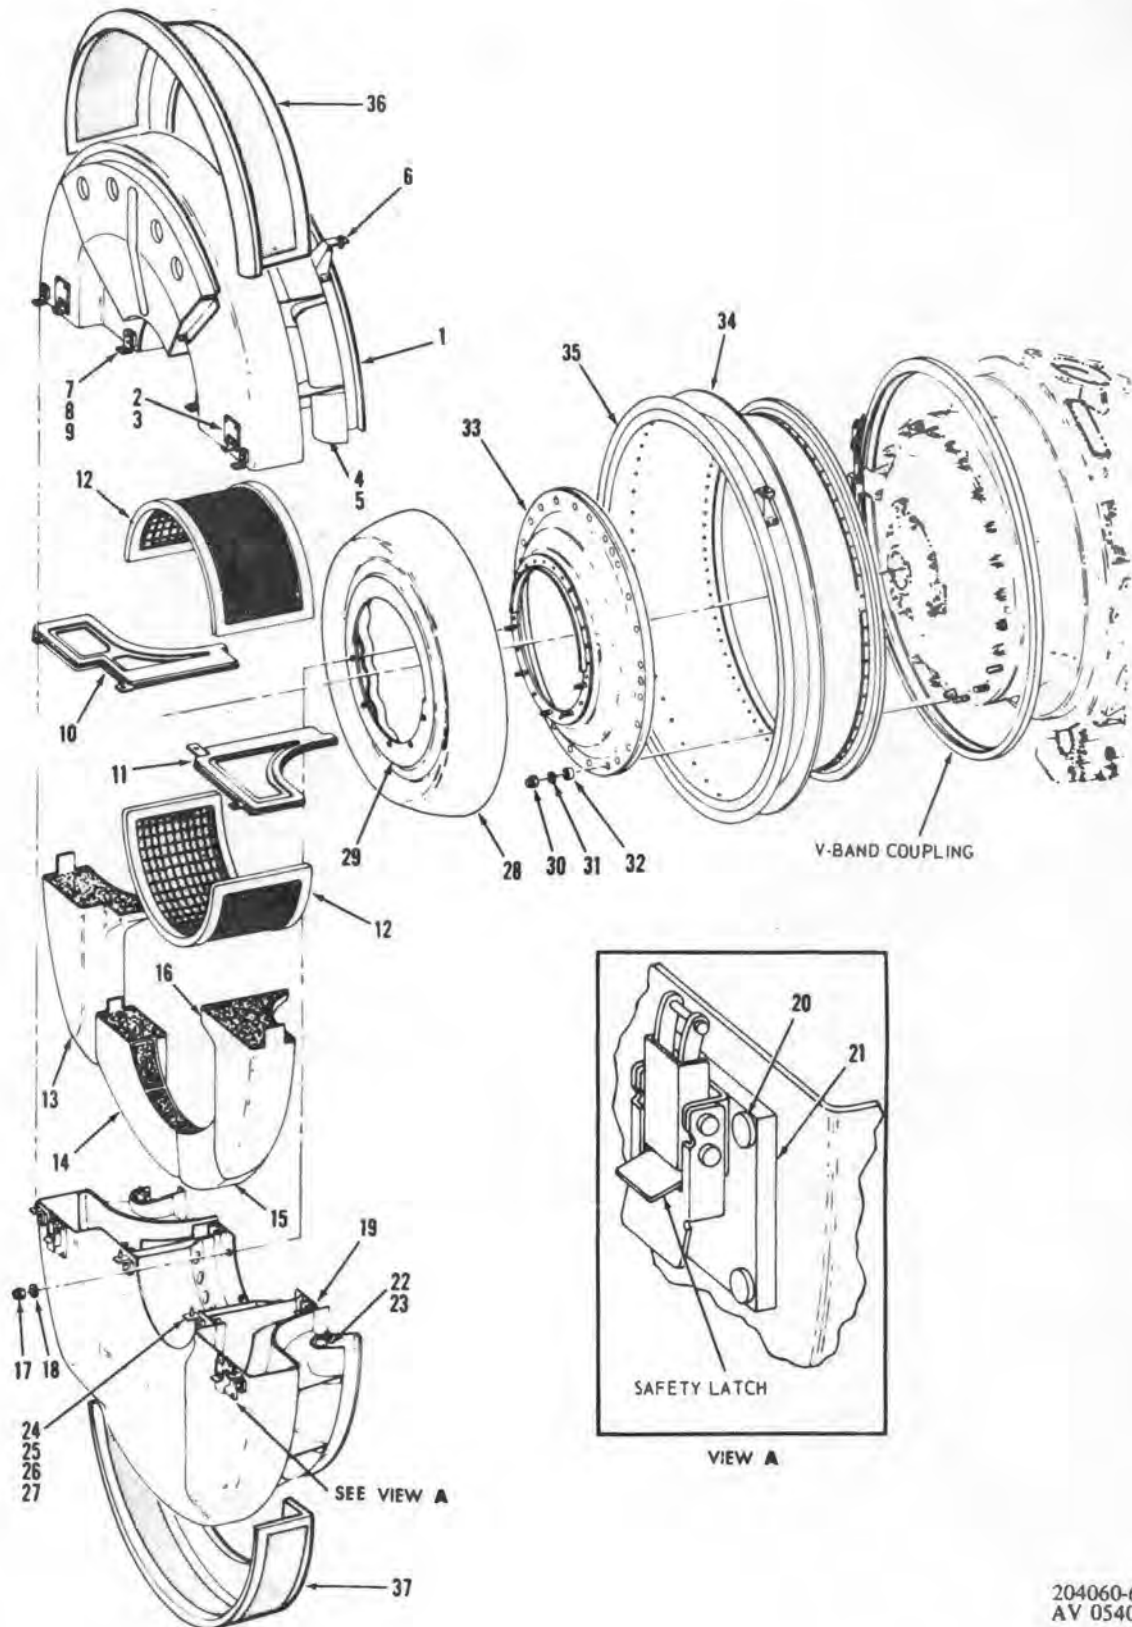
Sand and dust separator (UH-1H helicopters prior to serial No. 68-16066) (Sheet 1 of 2)
